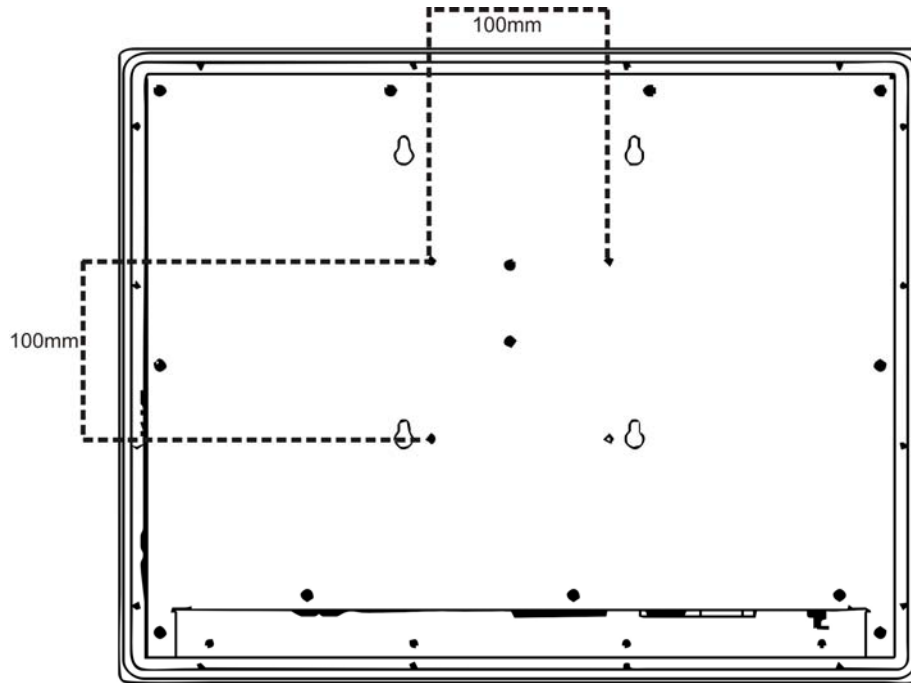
Wall Mounting Diagram – Mount the bracket
